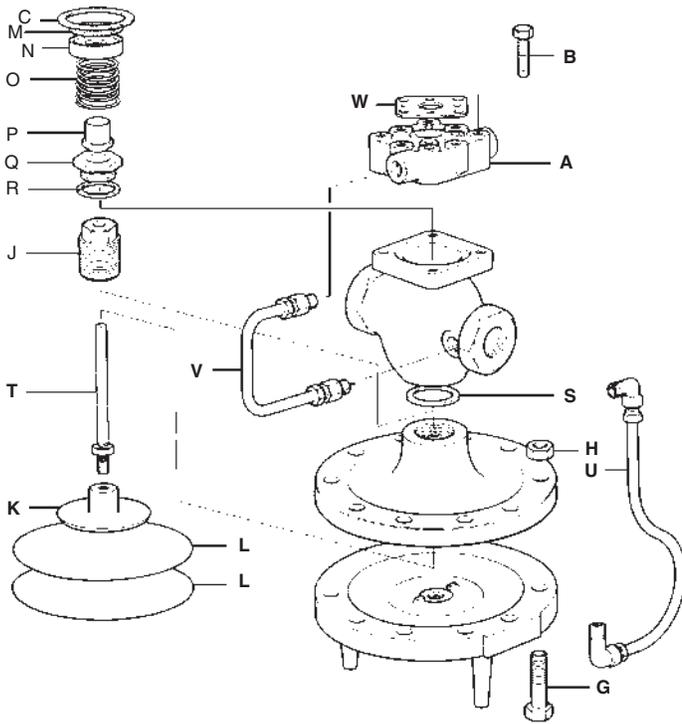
Note in 1/2" and 4" sizes, top of valve must be completely assembled and head must be on seat when measuring dimension "A" and when re-assembling diaphragms.
